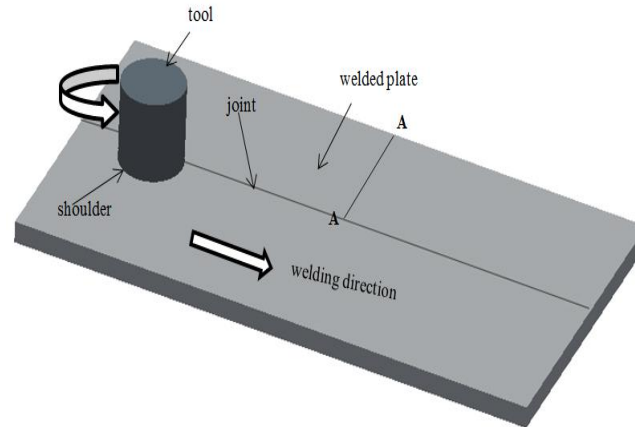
Schematic of Friction Stir Welding.
